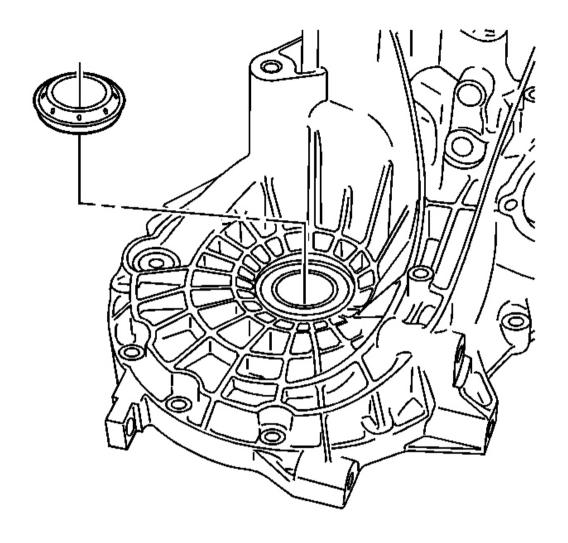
Differential Output Shaft Seal Courtesy of GENERAL MOTORS CORP.
